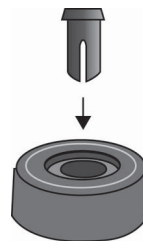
Inserting the Rivet Housing into the Bumper Foot
